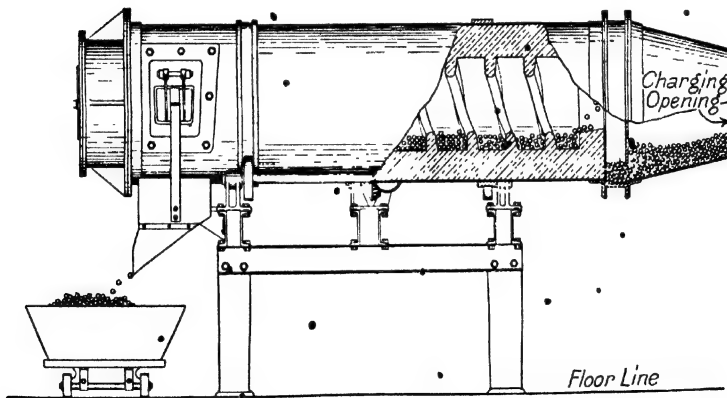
ROTARY HEAT TREATMENT FURNACE (ROCKWELL CO.).
